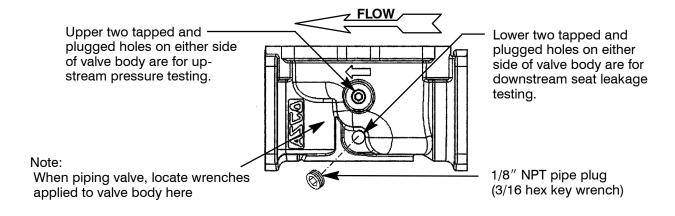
Provisions for wrench flats for piping valve and pressure and seat leakage testing
